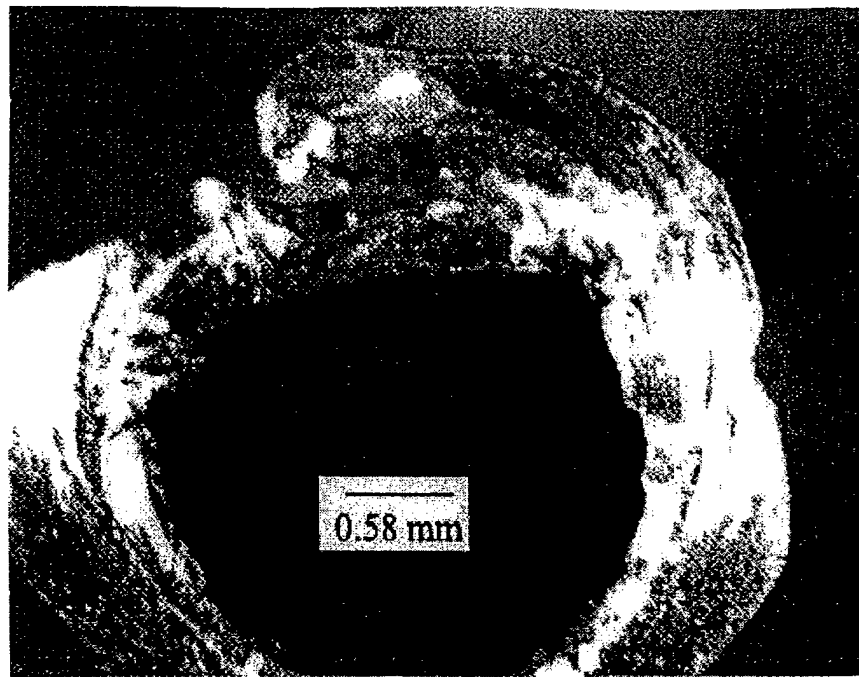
Photograph showing the cross-section of cored aluminum welding wire. The wire has a diameter of 0.170 inches (4.3 mm)
